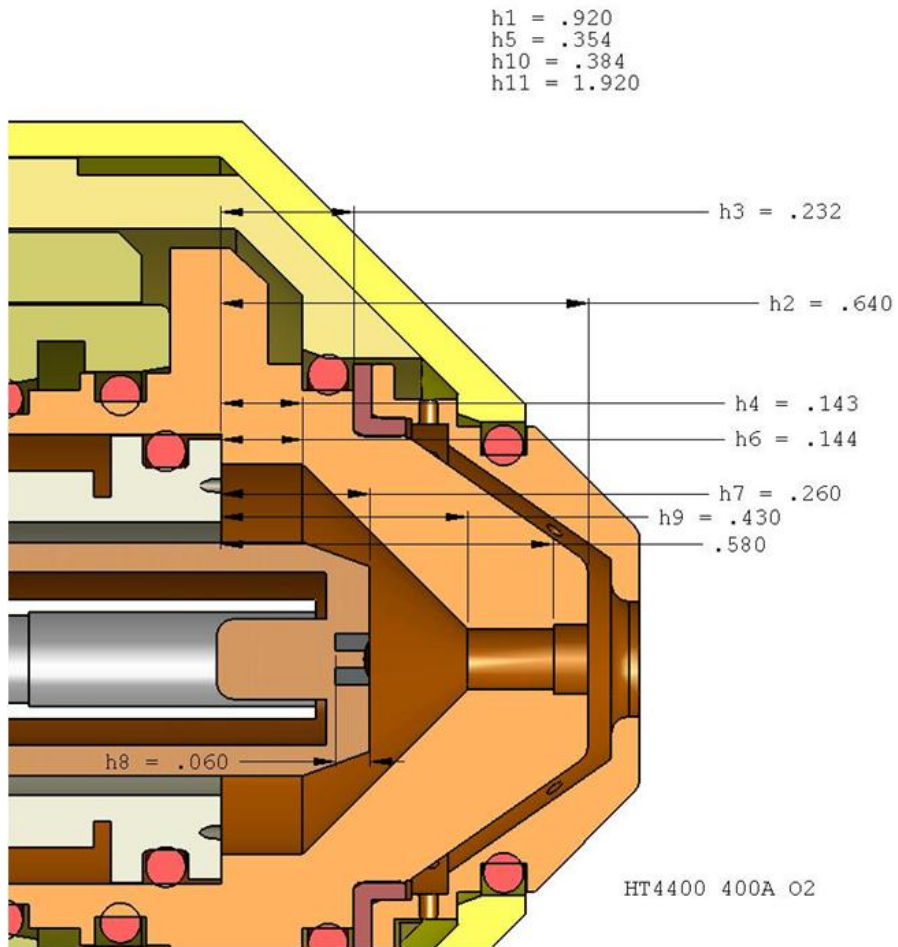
Section of HT4400 with axial dimensions (in mm)
